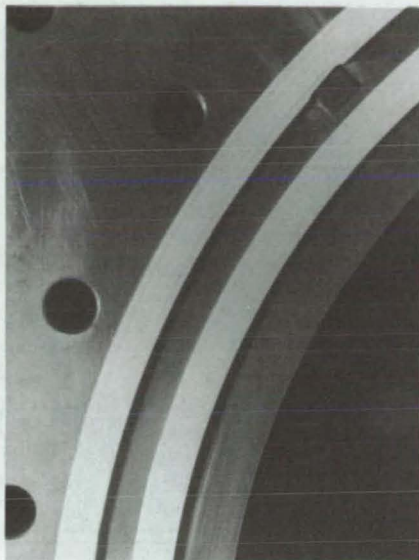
Two Concentric Spiral-Wound Seals are shown in their grooved flange.
